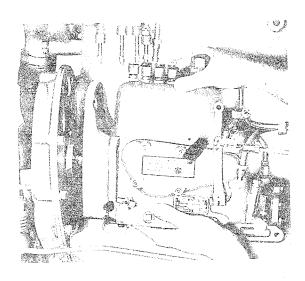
A. Removing the Complete Fuel Injection Pump Assembly
